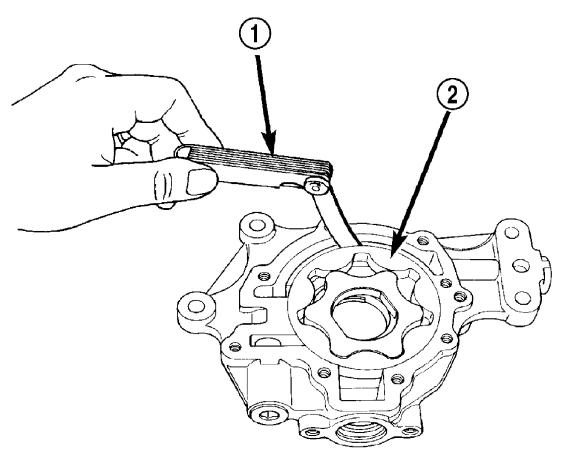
Measuring Outer Rotor Clearance In Housing Courtesy of CHRYSLER LLC
